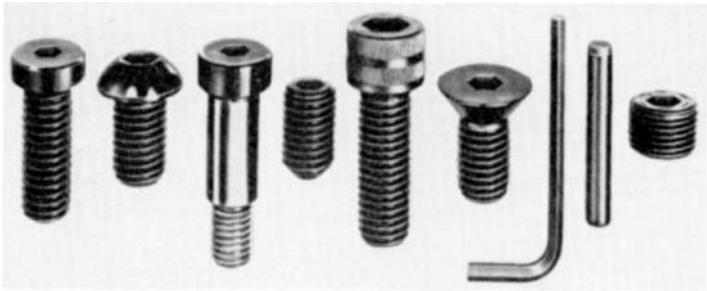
Hex-socket fasteners. From left to right, the parts are identified as a low socket-head cap screw, a button-head socket cap screw, a socket shoulder screw, a socket set screw, a socket-head cap screw, a socket flat-head cap screw, a hexagon key, a dowel pin, and a socket pressure plug. (*Holo-Krome Company.*)
